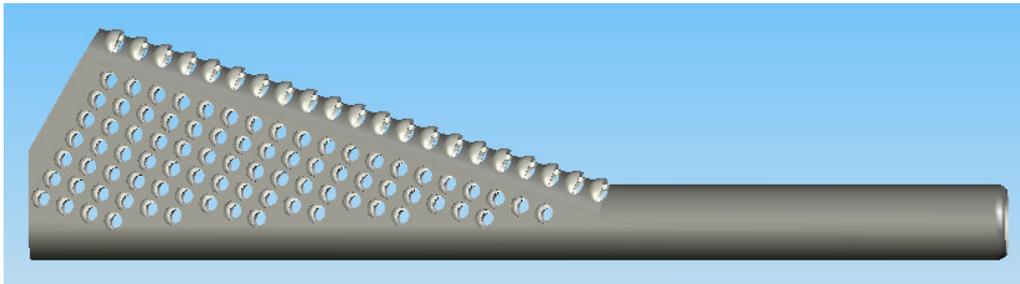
CAD image of the final shape for the rasp body prototype with half round semi- shears across the curved edge of the profile and on the side faces.
